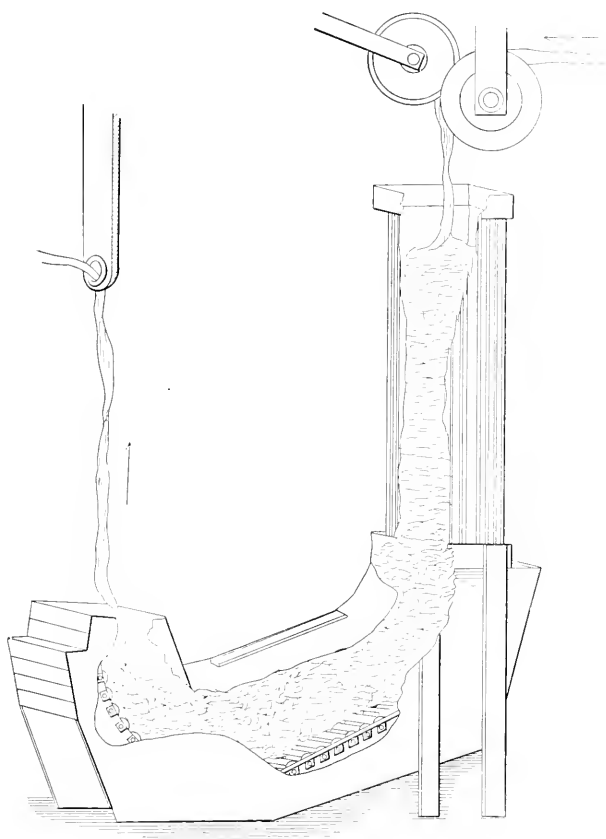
PROGRESS OF CLOTH THROUGH MACHINE.
